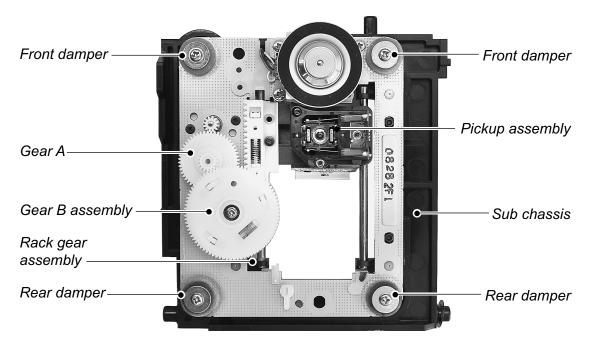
Pickup mechanism chassis assembly (Top side)
